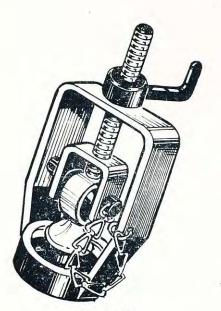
61–3503 Rear damper dismantling and assembly tool.
